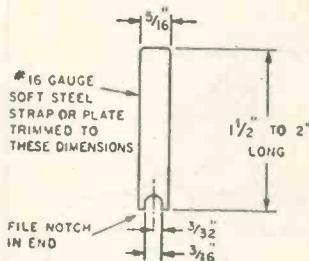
Special head height adjusting tool. (Courtesy RCA.)
